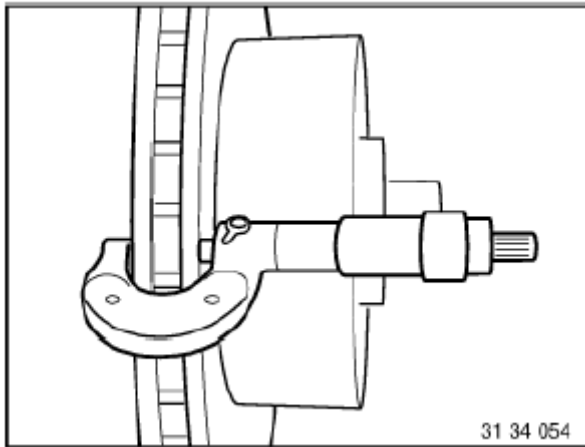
Checking Brake Surface Thickness Using Micrometer Gauge
